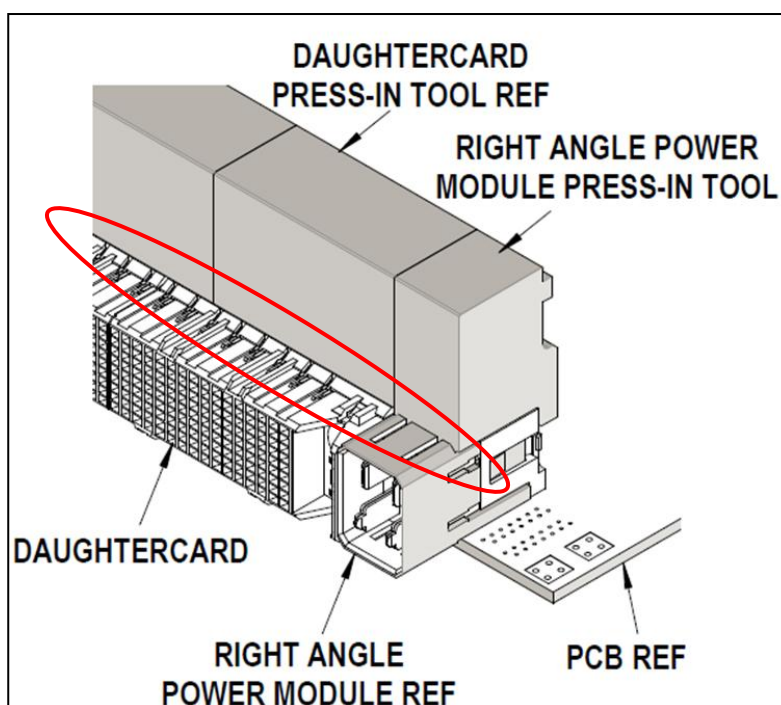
Correct tool or flat rock placement for right angle connectors – tool seated behind front housing ridge
